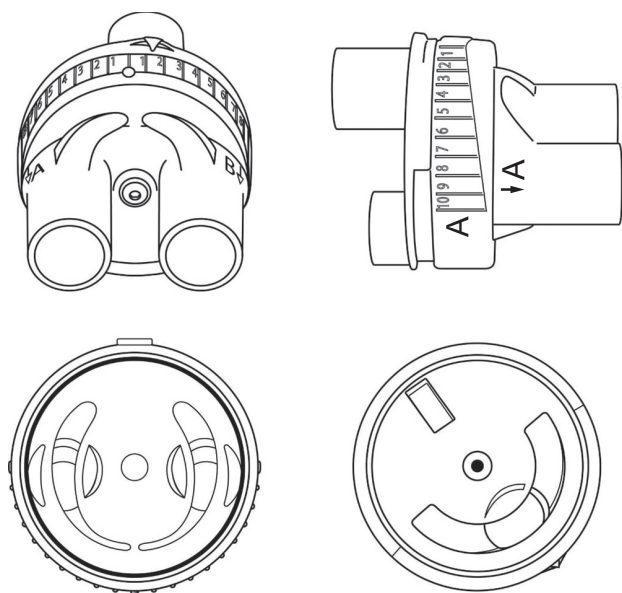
Adjustable flow diverter valve. Bottom images show exploded view.
